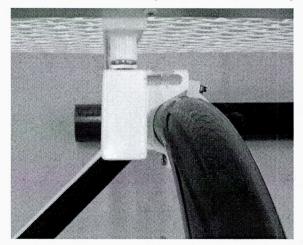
Beam Adjustment, Step 1 – Shim Rear Beam
